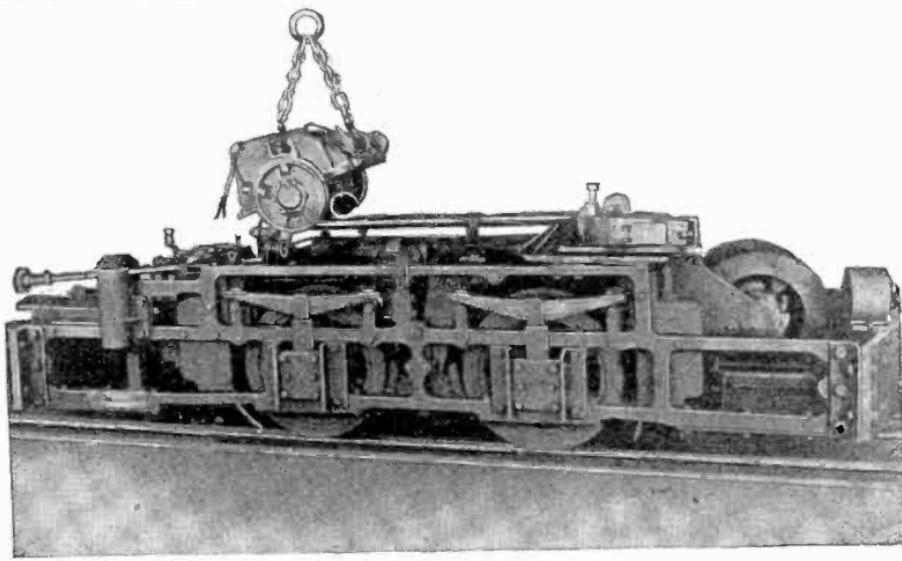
,177.—Method of removing top half of split frame motor and armature.
